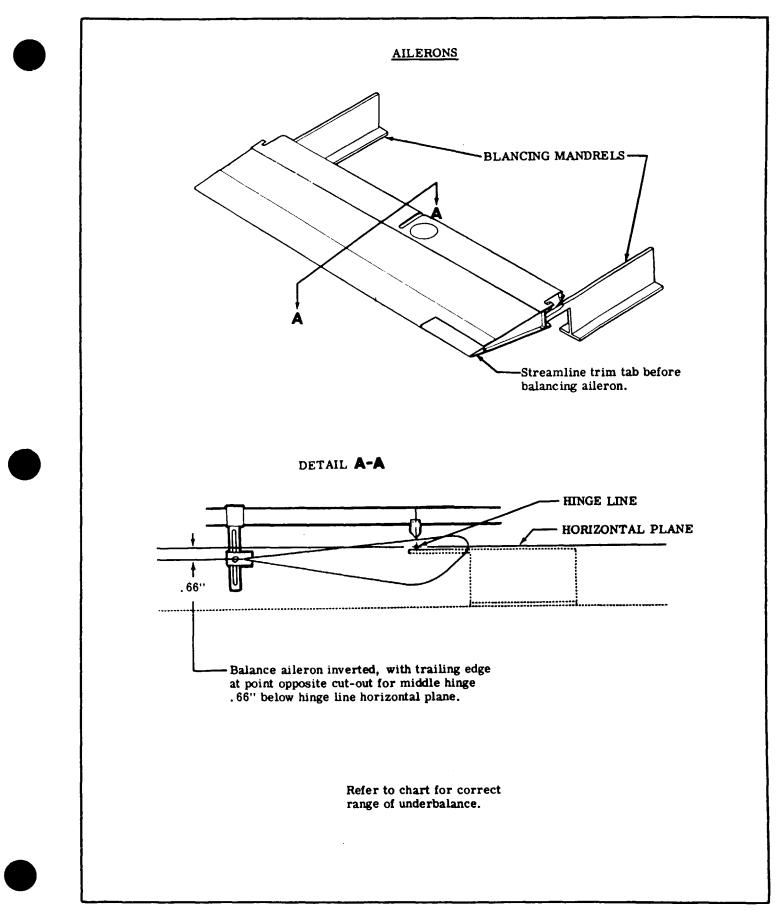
Control Surface Balancing (Sheet 3 of 4)
